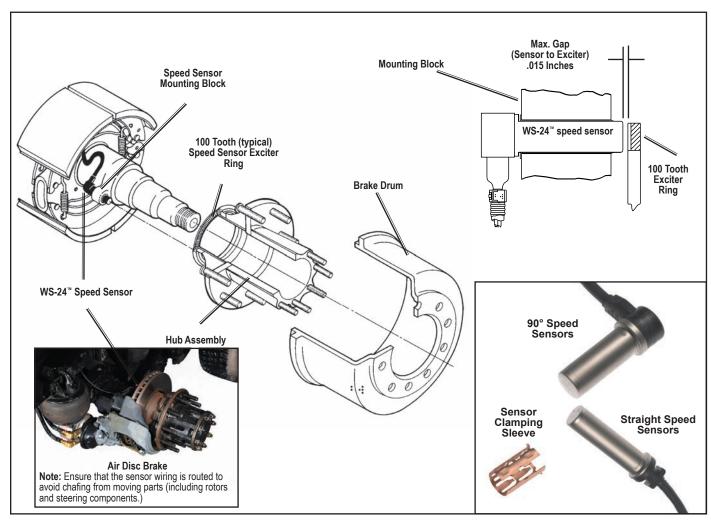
WS-24™ WHEEL SPEED SENSOR INSTALLATION (S-CAM AND AIR DISC BRAKE)
